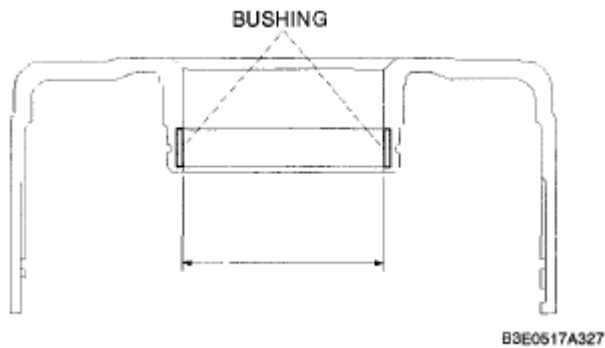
Measuring Bushing Of 2--4 Brake Drum
